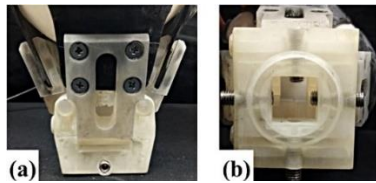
(a) Preliminary prototype of the movable attachment mechanism, manufactured by 3D printing. (b) The new attachment replicates in the bottom part a traditional female prosthetic pyramidal adapter.
